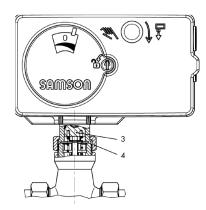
Force-locking attachment with coupling nut, e.g. to Type 3222 Valve
